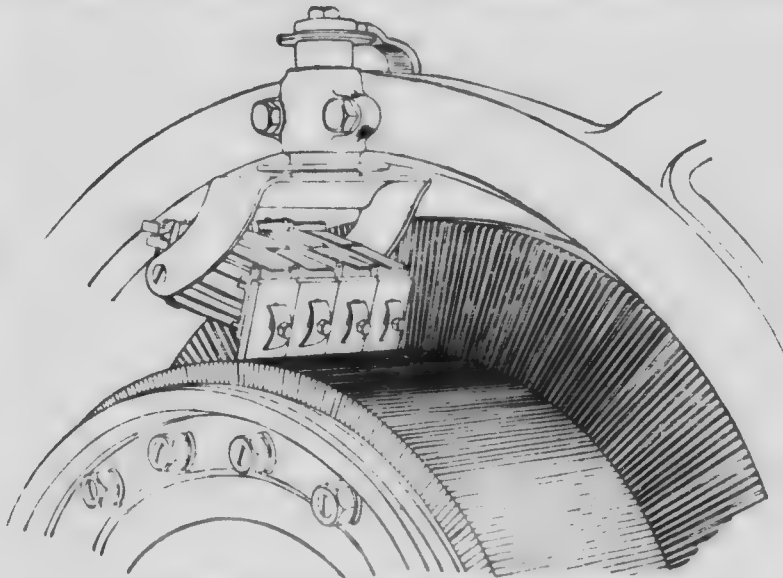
Dick, Kerr and Co.'s Carbon Brush Holders for Large Machines.
